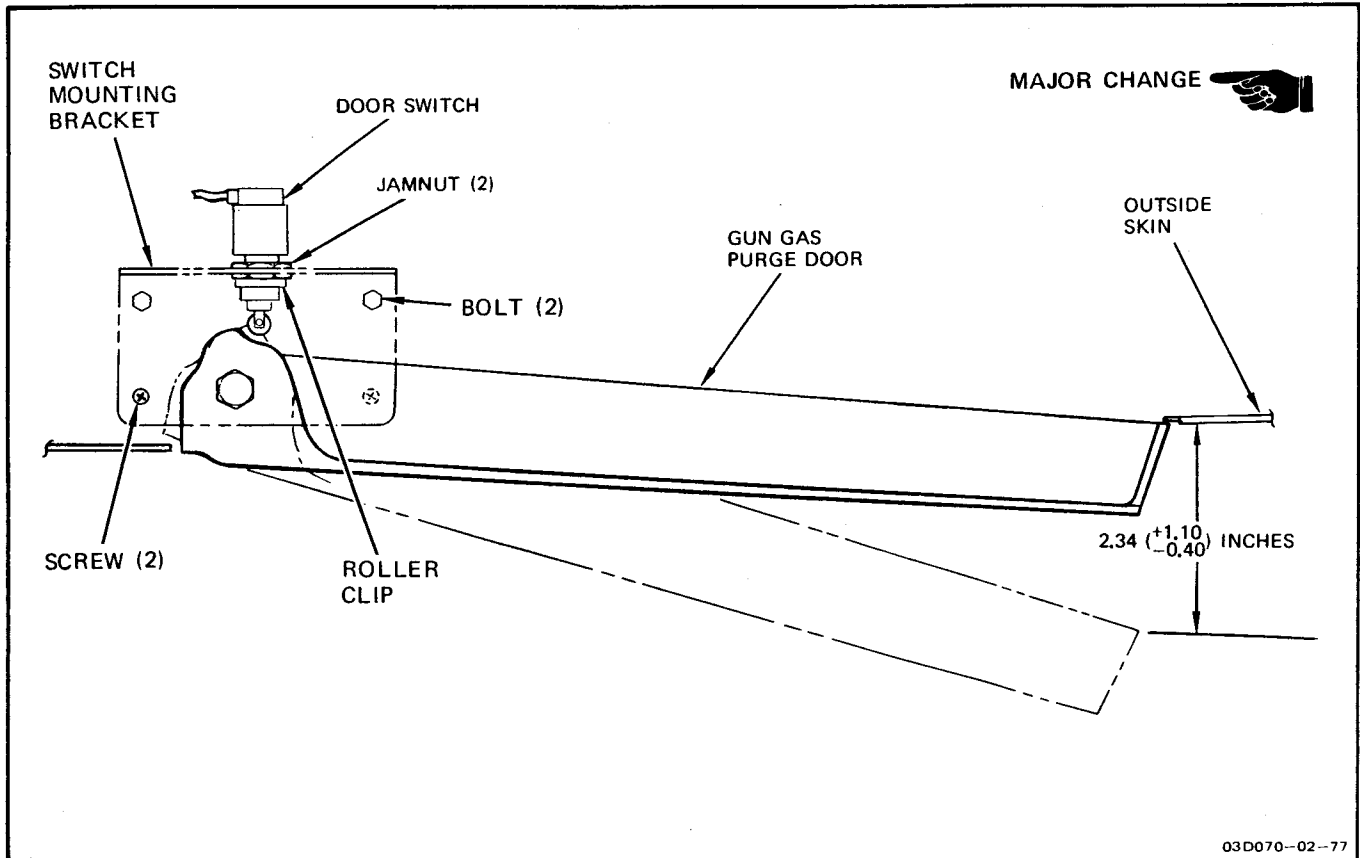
Gun Gas Purge Door Switch Adjustment
